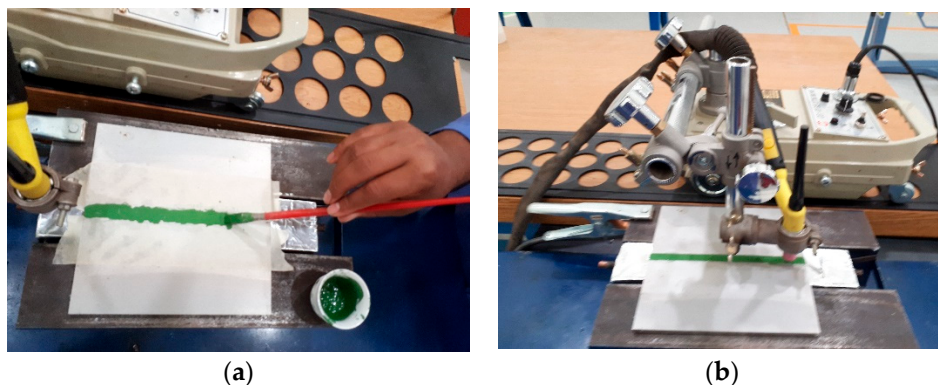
Deposition of flux on the workpiece (a) and the motorized carriage of the welding machine (b).
